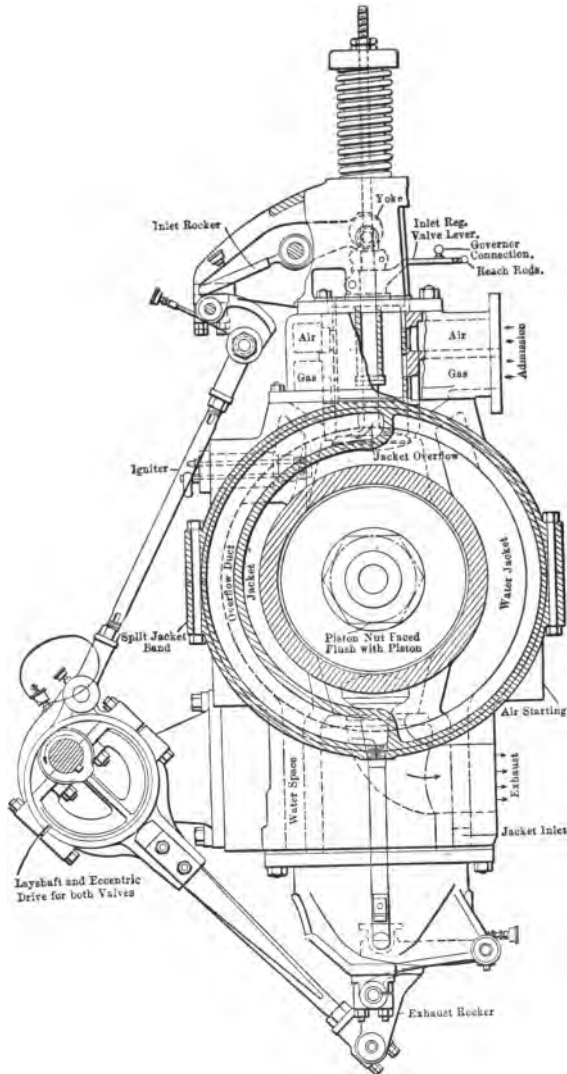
ECCENTRIC AND WIPER-CAM VALVE GEAR.
